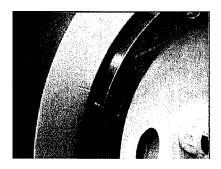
Match-Mark Alignment of Damper Assembly and Aft Adapter
